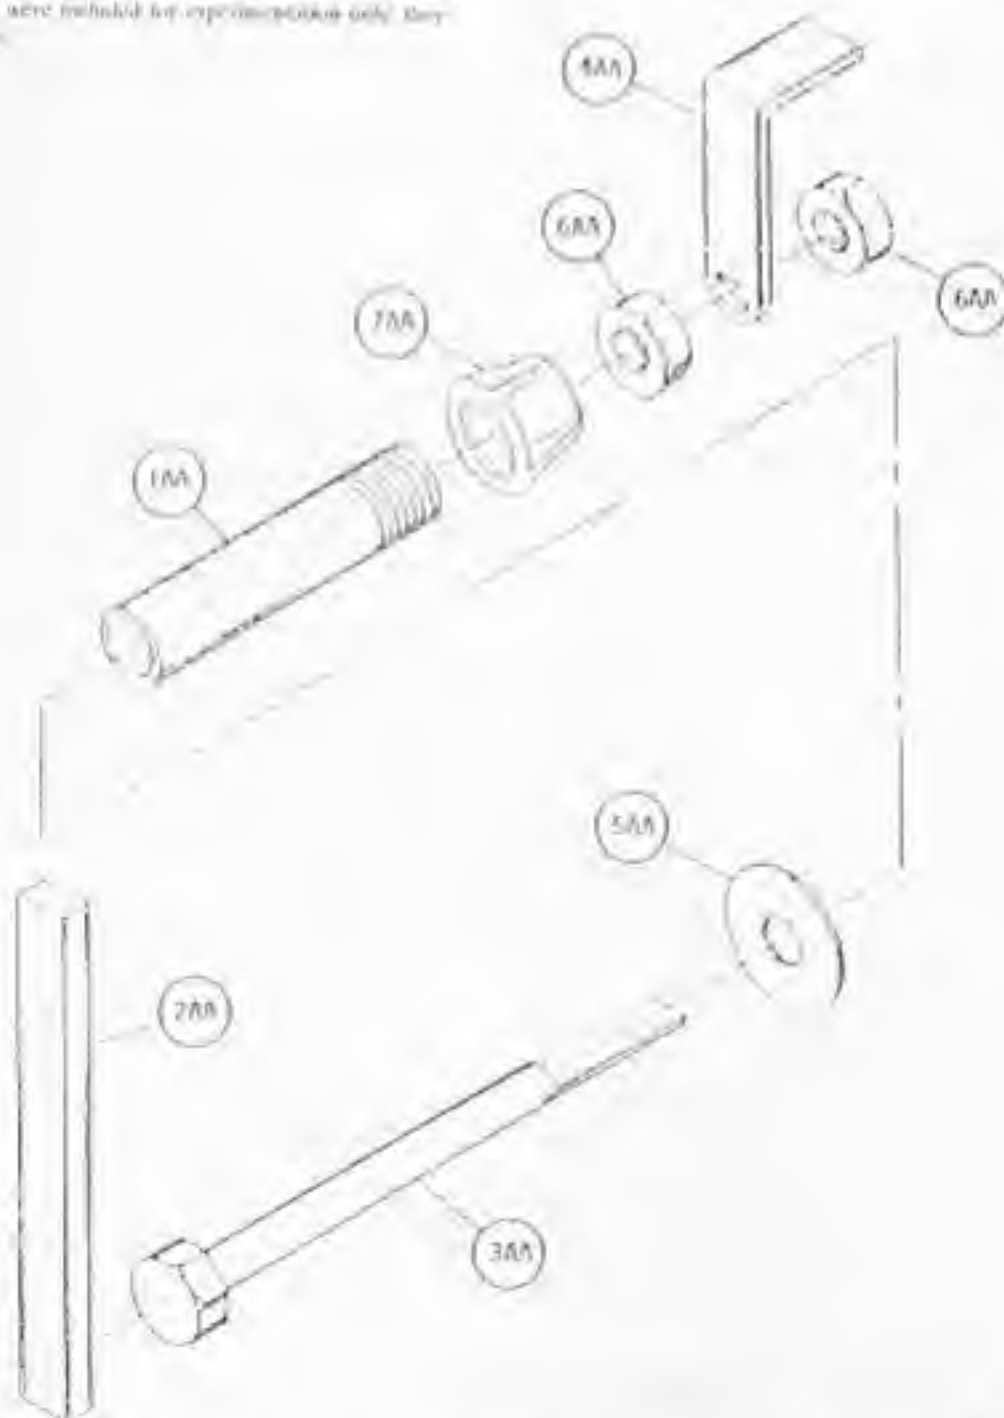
Exploded, schematic diagram of the gate shaking mechanism.
